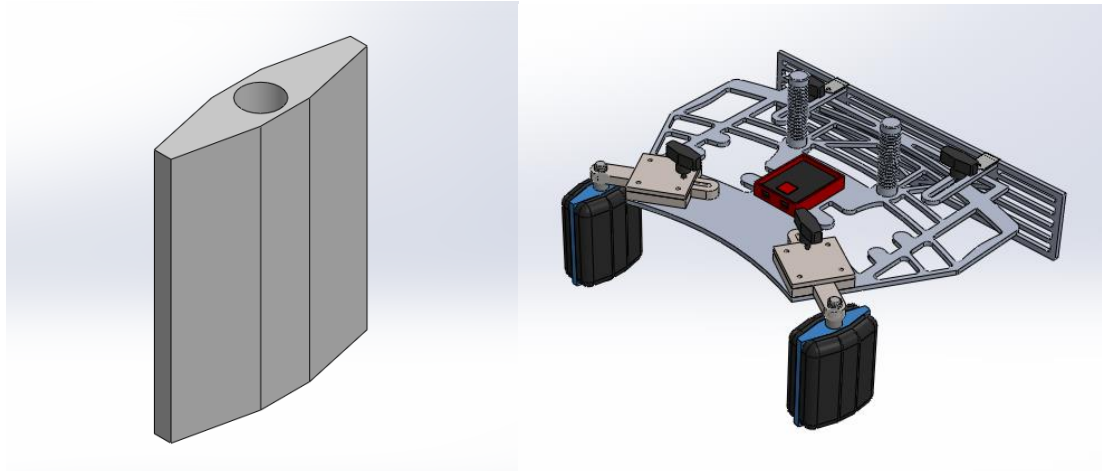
The SolidWorks model of the pad mount part (Left) and the integrated model where the pad mount parts are highlighted blue (Right).
